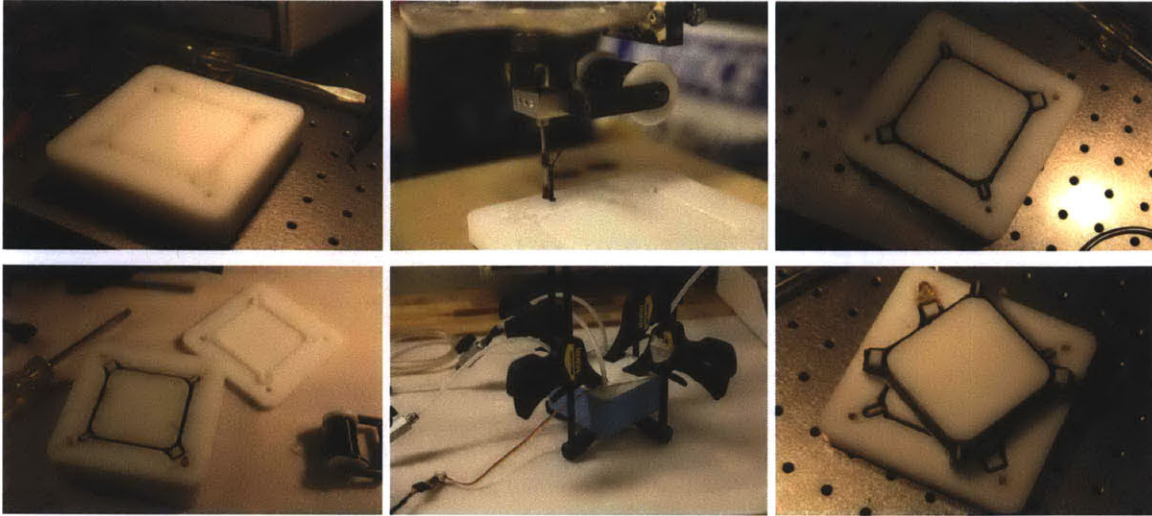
A) Mold layer, ready for winding. B) Automated winding attachment in a 3 axis CNC machine. C) Mold layer, dry wound. D) With male compression layer ready to insert. E) RTM with one resin inlet and 3 vacuum outlets, E) Demolding layers of composite parts.
